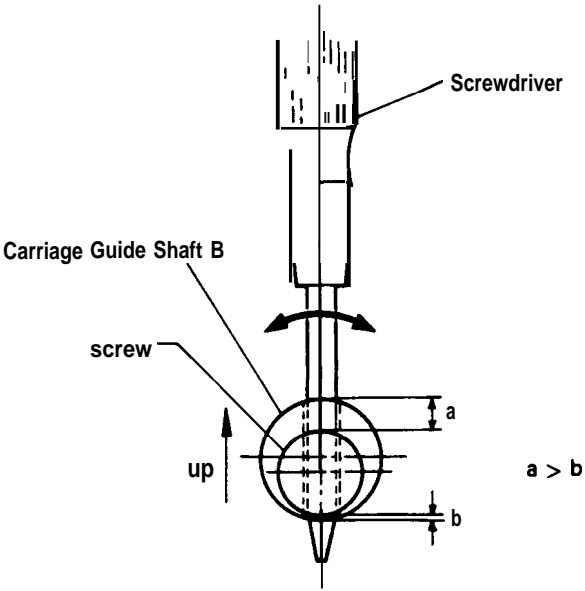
Eccentric of Carriage Guide Shaft B
